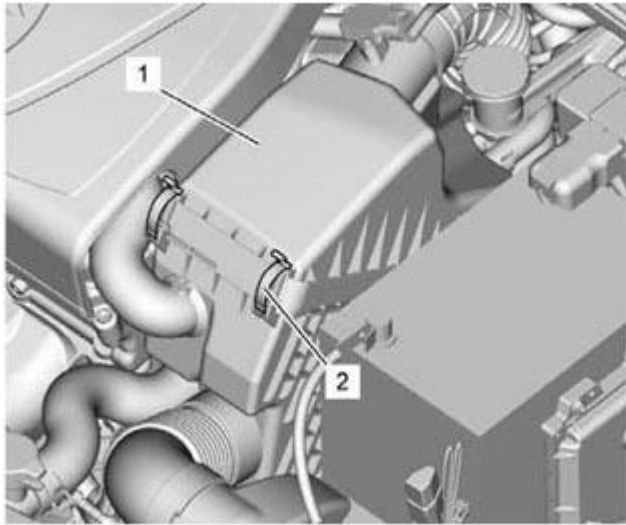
Identifying Air Cleaner Replacement Components
